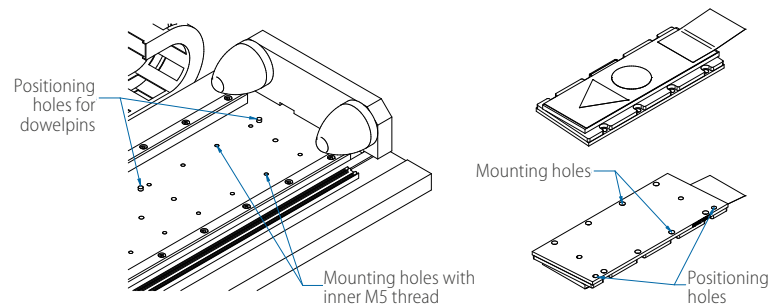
Positioning and mounting holes in magnet plates and axis.
